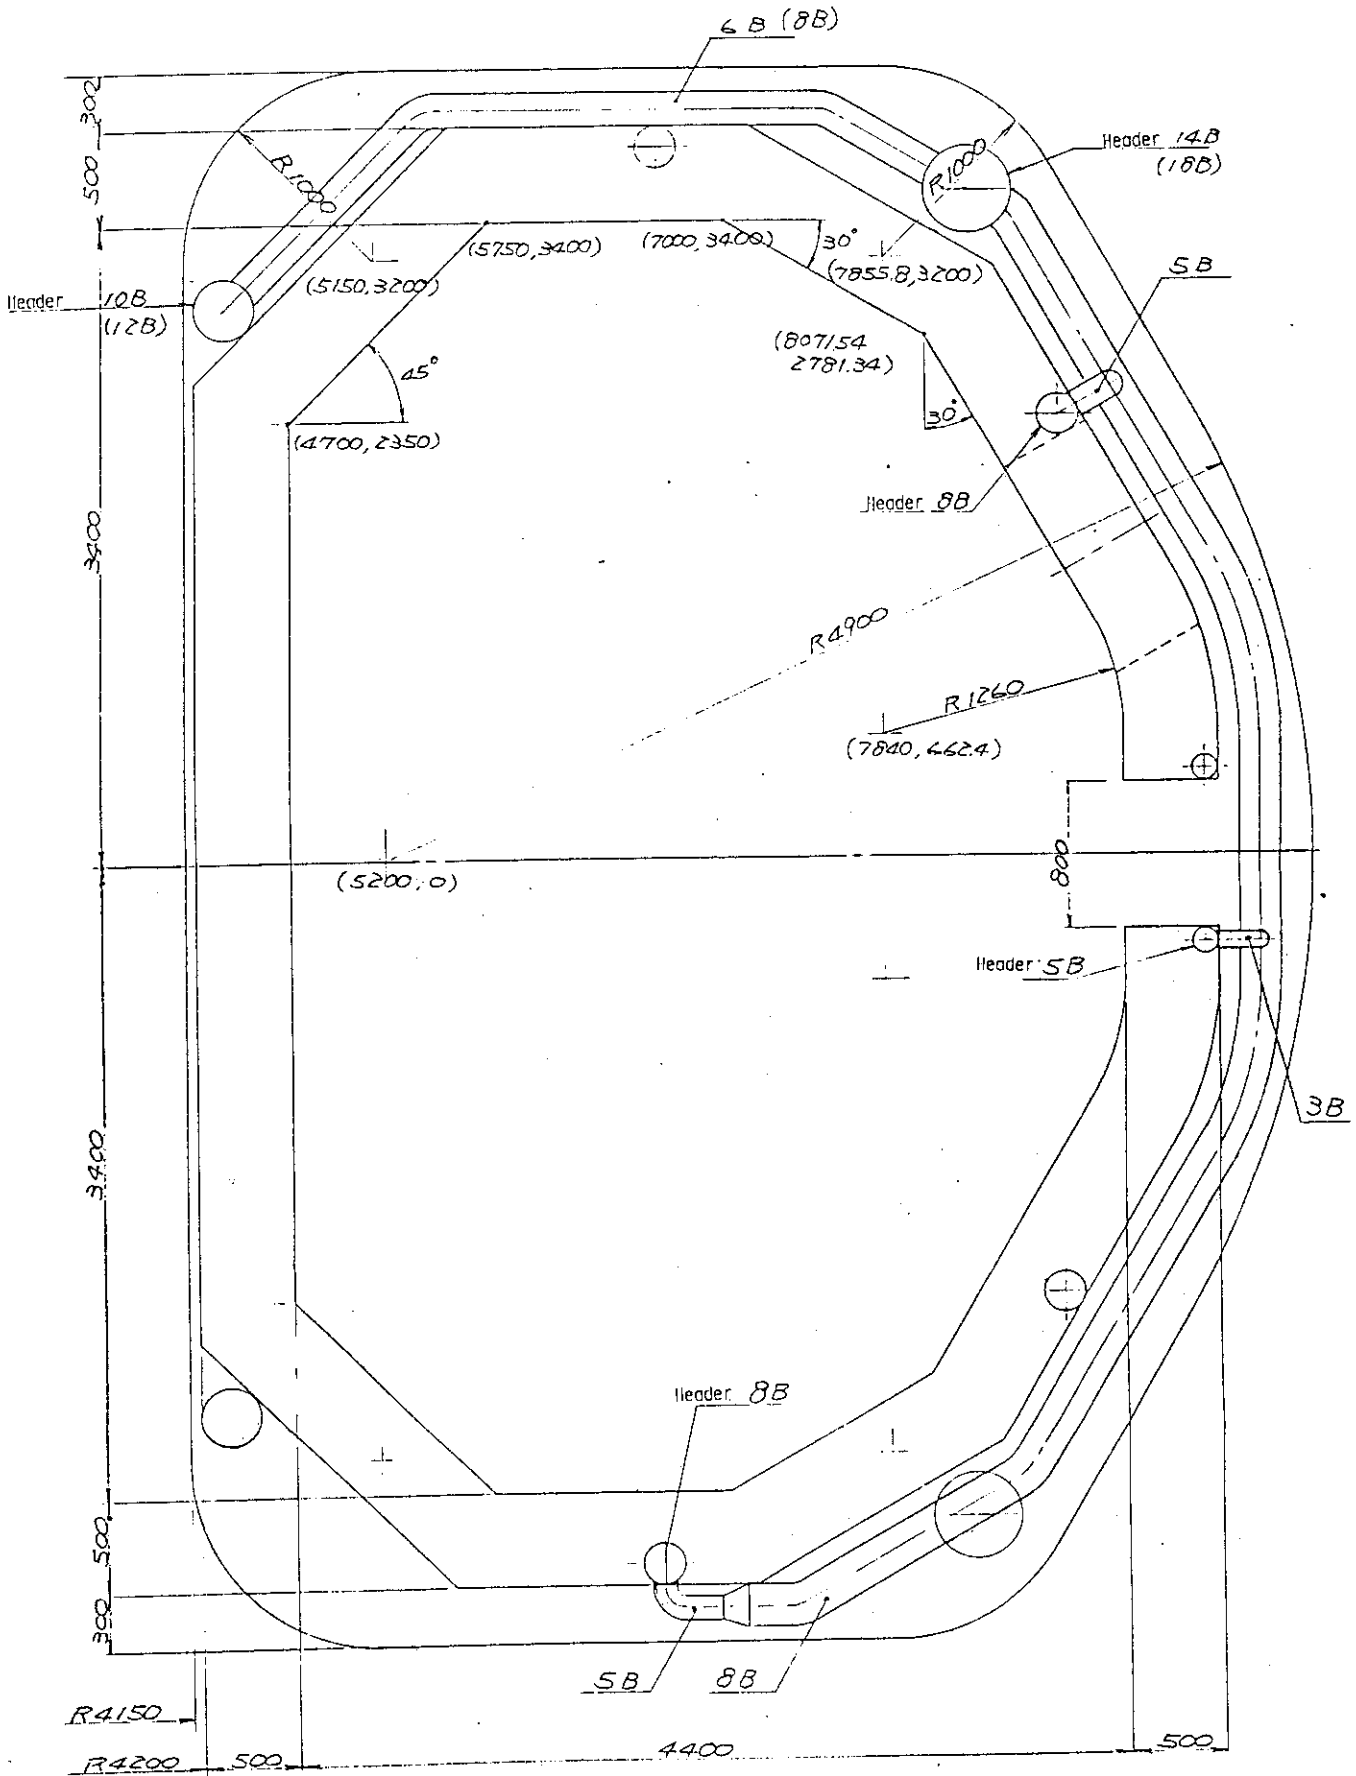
SPTR Power Plant (Elevation View of Blanket Piping (Outlet))
